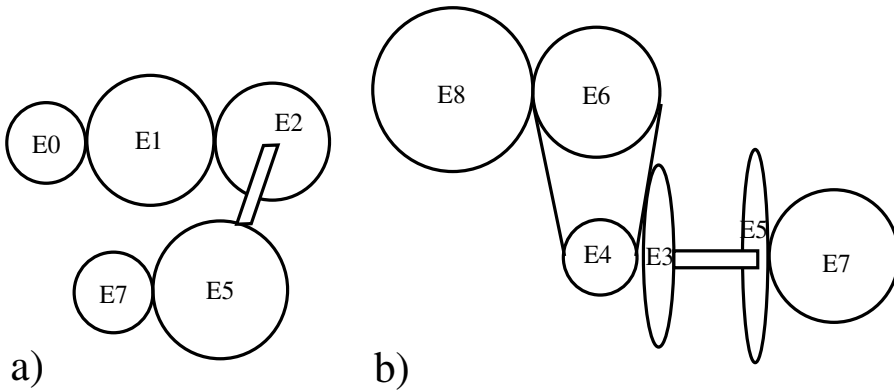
Steering mechanisms. (a) Goal-direction system and (b) evasive compass gearing.
